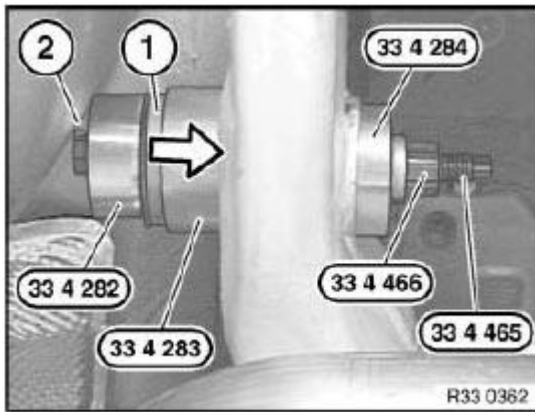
Identifying Special Tools (33 4 282, 33 4 283, 33 4 284, 33 4 466 And 33 4 465)
